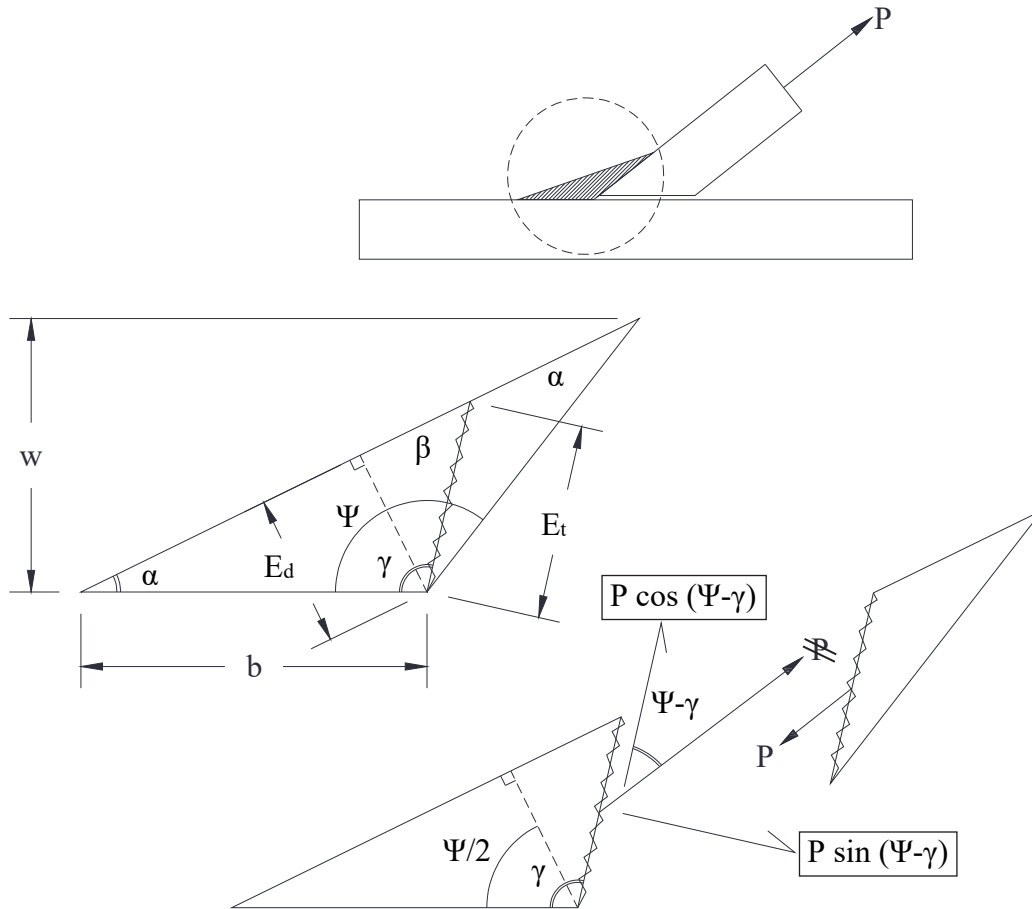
Skewed T-Joint with a single fillet weld.
